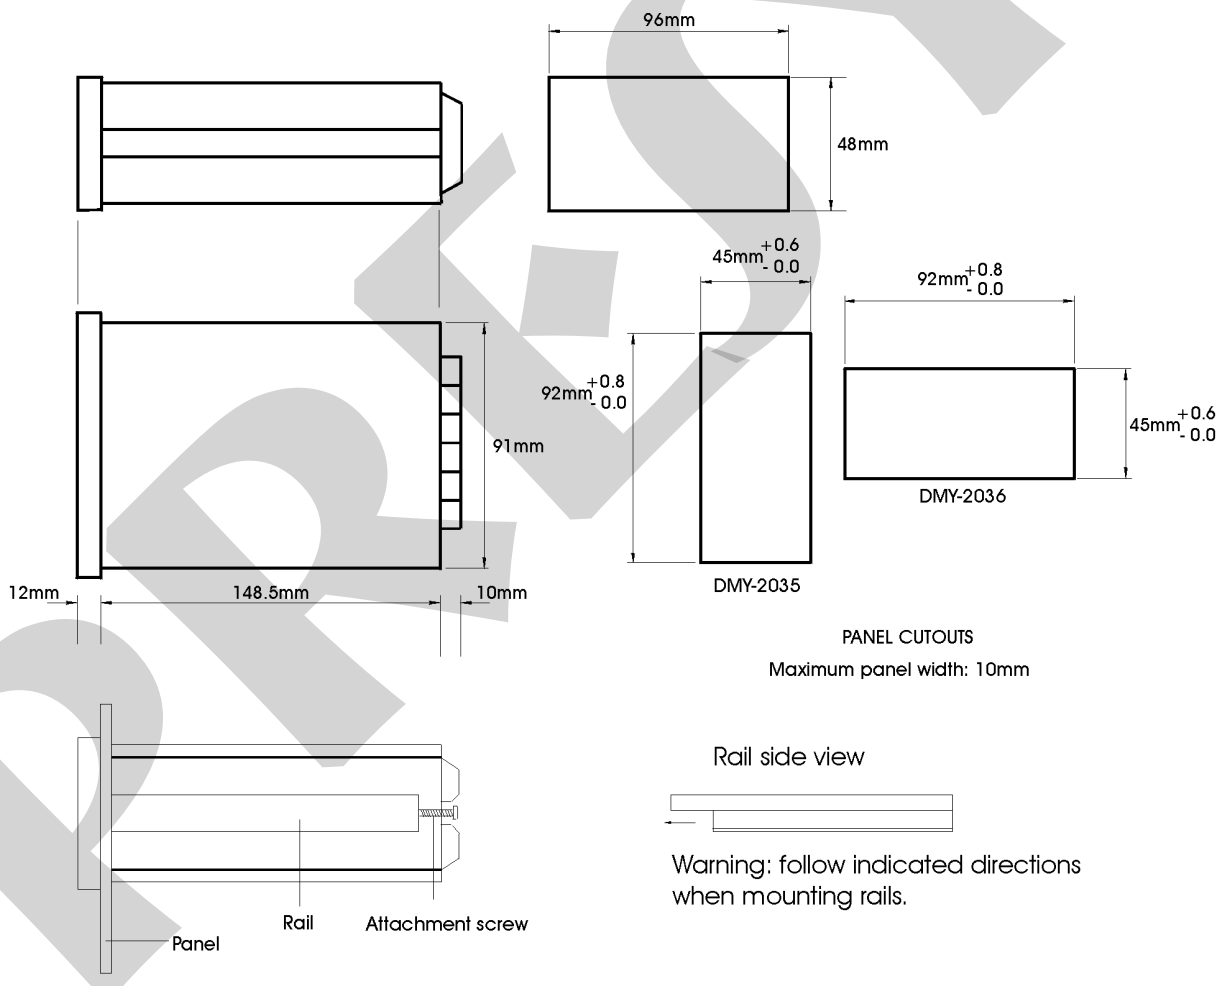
Dimensional drawing, panel mounting cutout and side view for DMY-2035/2036 Indicators
